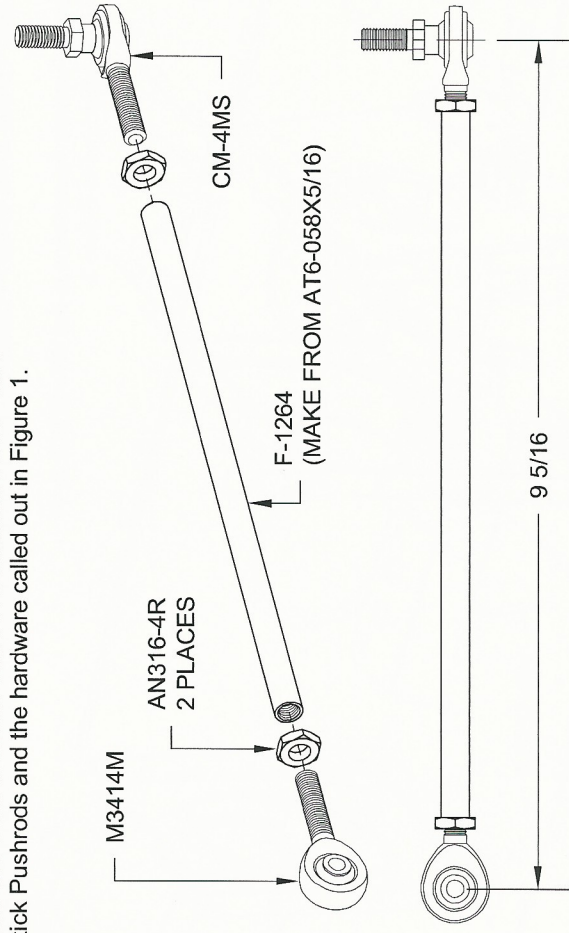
CONTROL STICK PUSHROD ASSEMBLY
